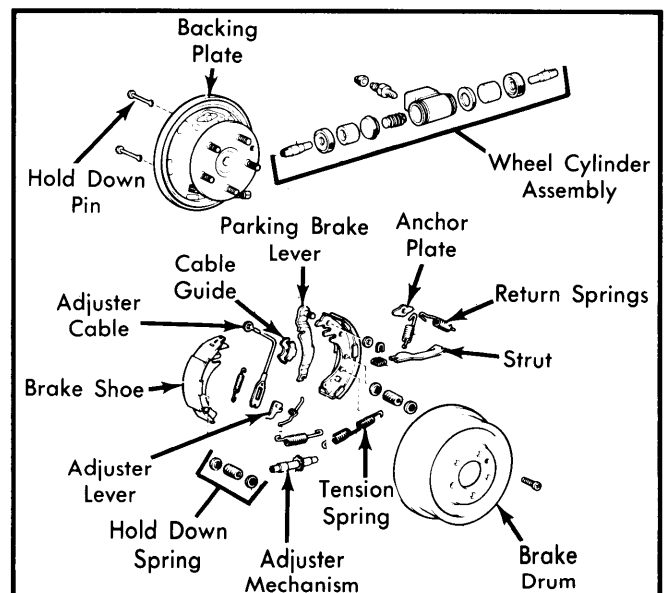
Exploded View of Cab and Chassis Pickup and 4-WD Pickup Rear Brake
